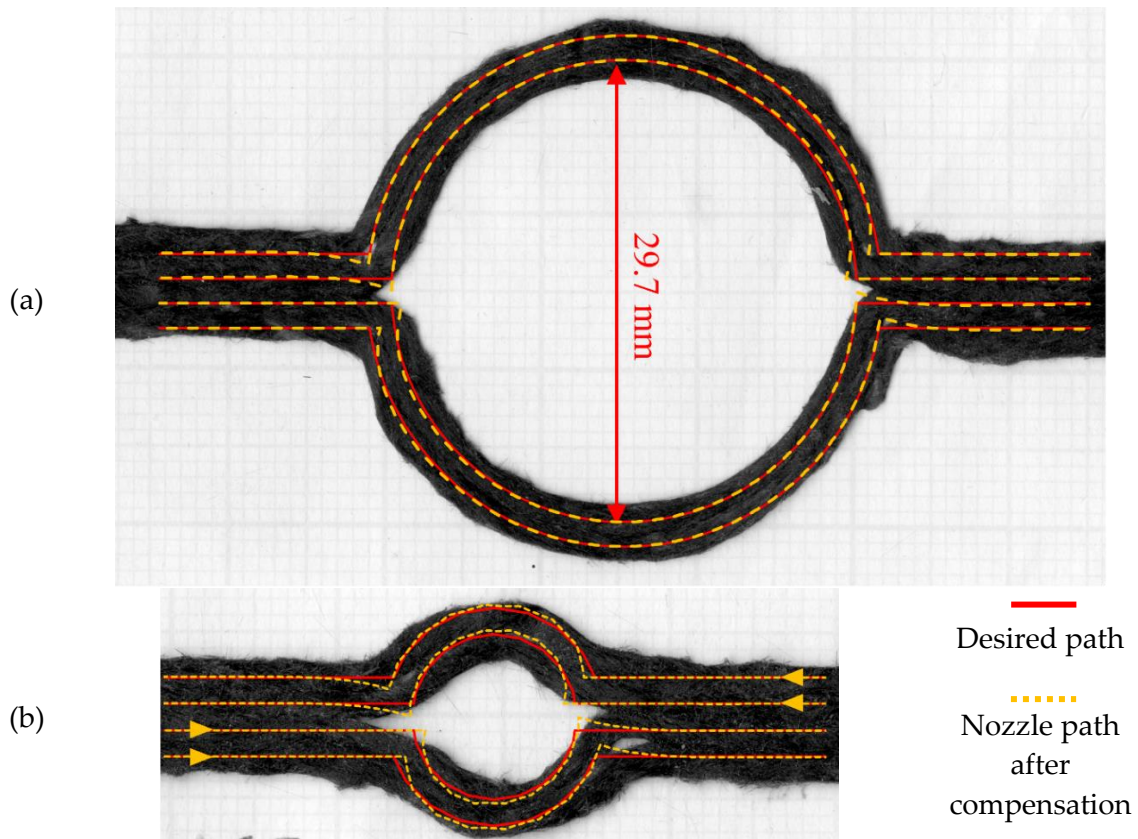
Curvilinear open hole printing with the developed algorithm: (a) large hole size 30-mm showing promising deposited hole size and decent deposited raster (recalled from Figure 6.13)); (b) small hole size 10-mm showing large discrepancy.
